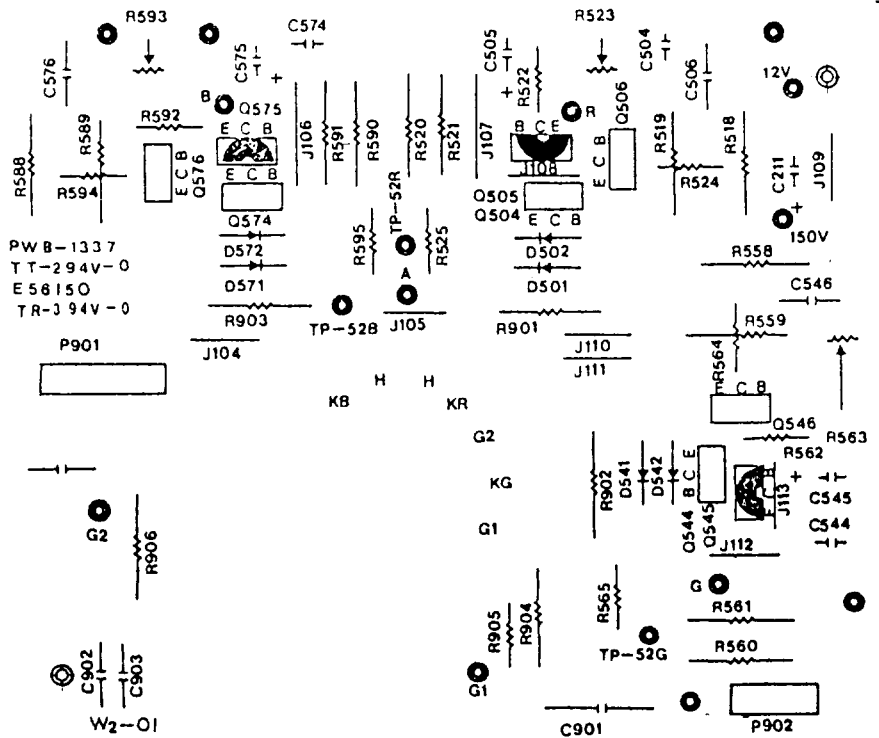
PCB-CRT DRIVE COMPONENTS LAYOUT
